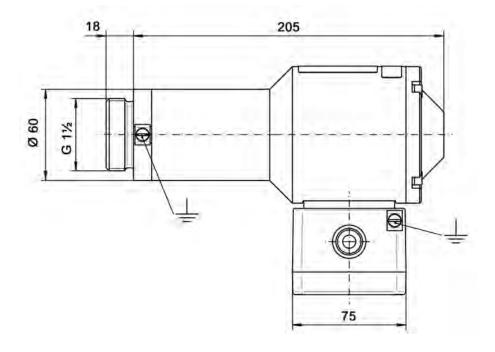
Dimensional drawing compact flame scanner F200K Ex (for Ex zone 1, 21), with connection area
